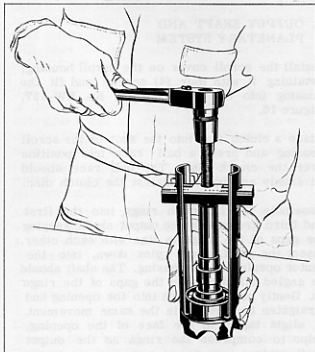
REMOVING INPUT SHAFT INNER BEARING
